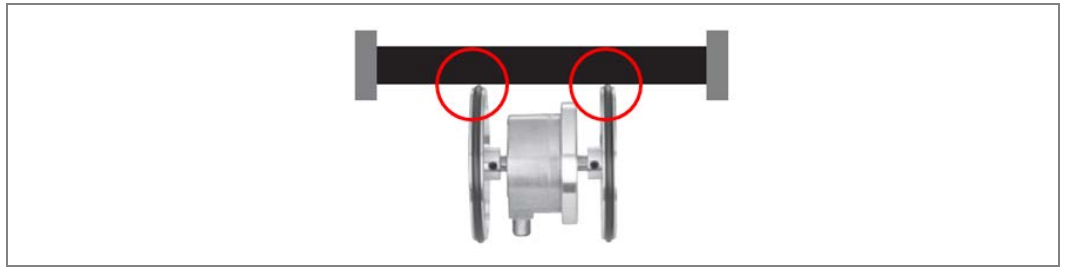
Visual inspection of the measuring wheel encoder
